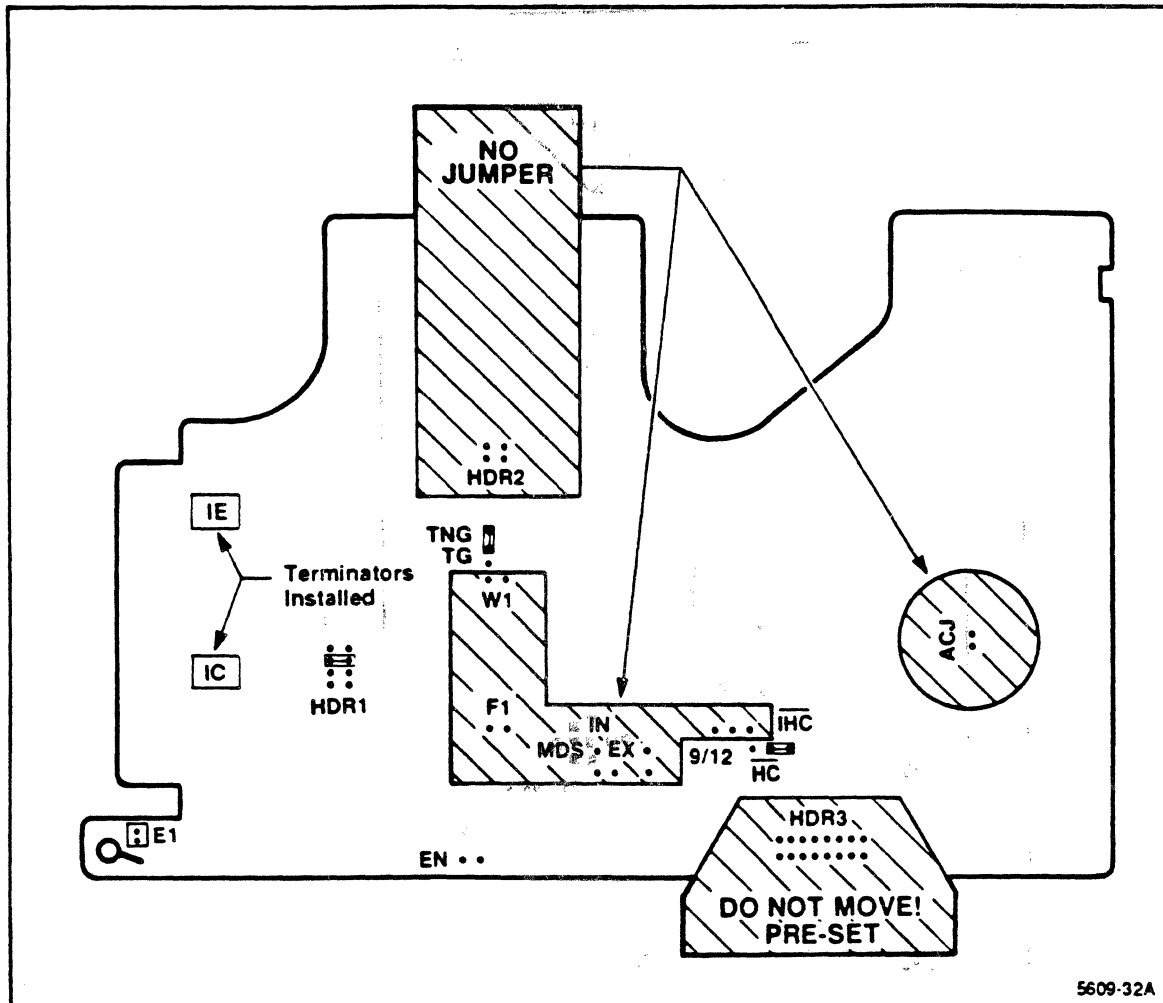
Hard Disk Drive Controller Board Jumpers.
